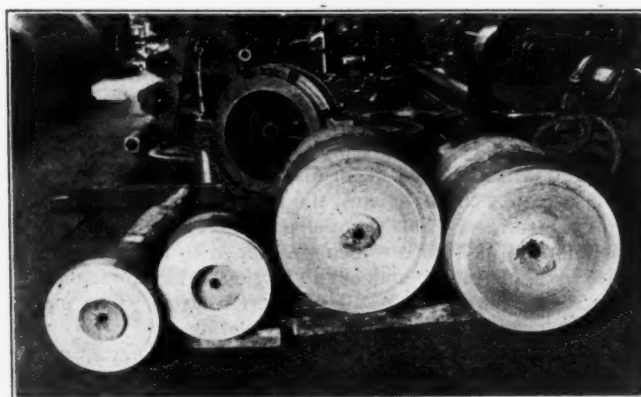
SHAFTS SHOWING THE CLINK TYPE OF DEFECT
